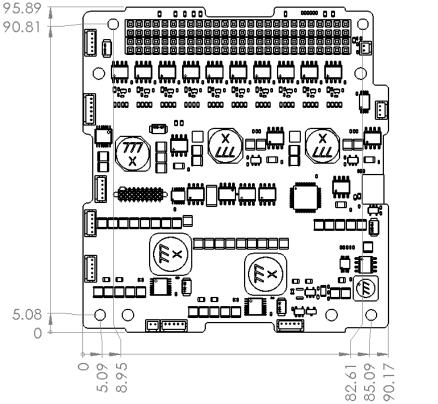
Dimensioned Drawing of 25-02451 1UB EPS
